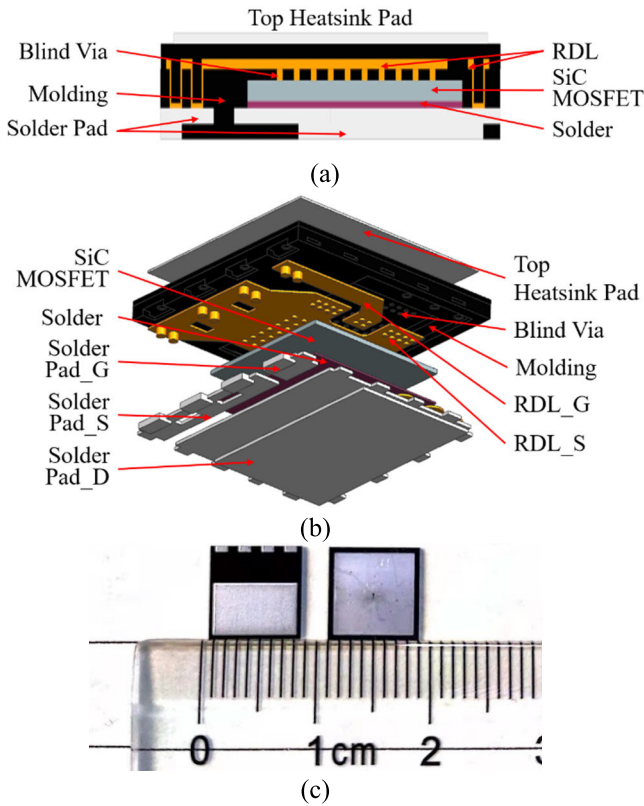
SiC MOSFET FOPLP structure: (a) cross section view, (b) exploded view, and (c) photograph.
